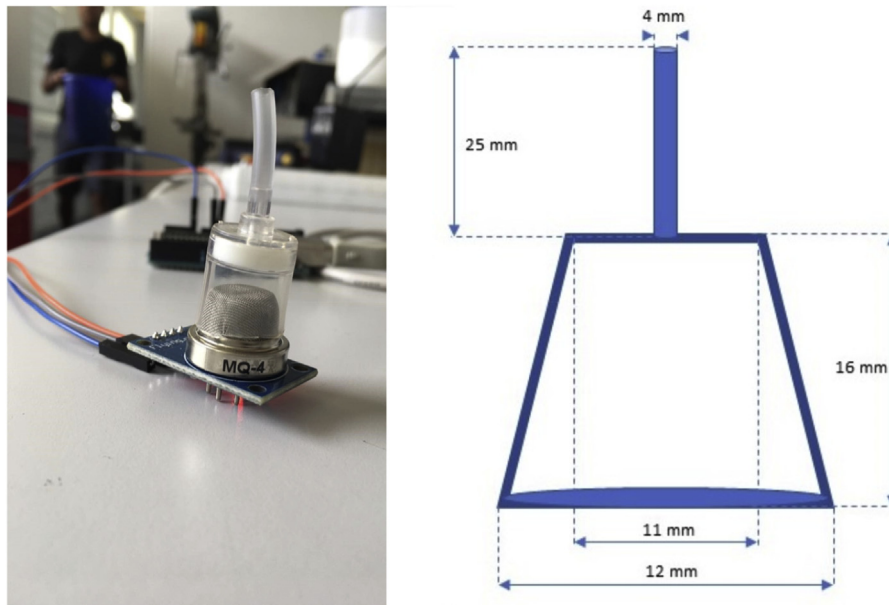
The partially closed capsule for direct gas measurement and its dimensions.
